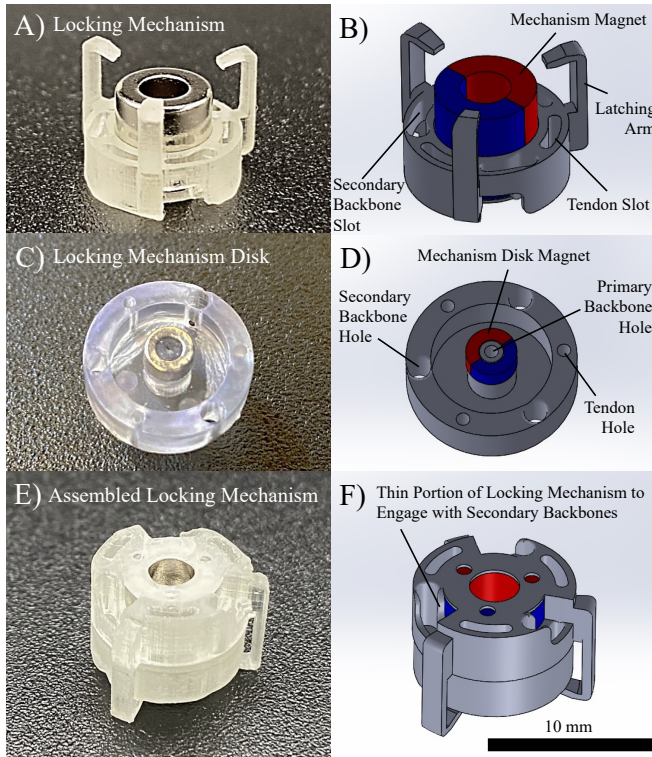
Magnetic locking mechanism components. A) Magnetic locking mechanism. B) CAD model of the magnetic locking mechanism. C) Locking mechanism disk with which the locking mechanism is paired. D) CAD model of the locking mechanism disk. E) Magnetic locking mechanism assembled with its corresponding disk. F) CAD model of the magnetic locking mechanism assembled with its corresponding disk.
